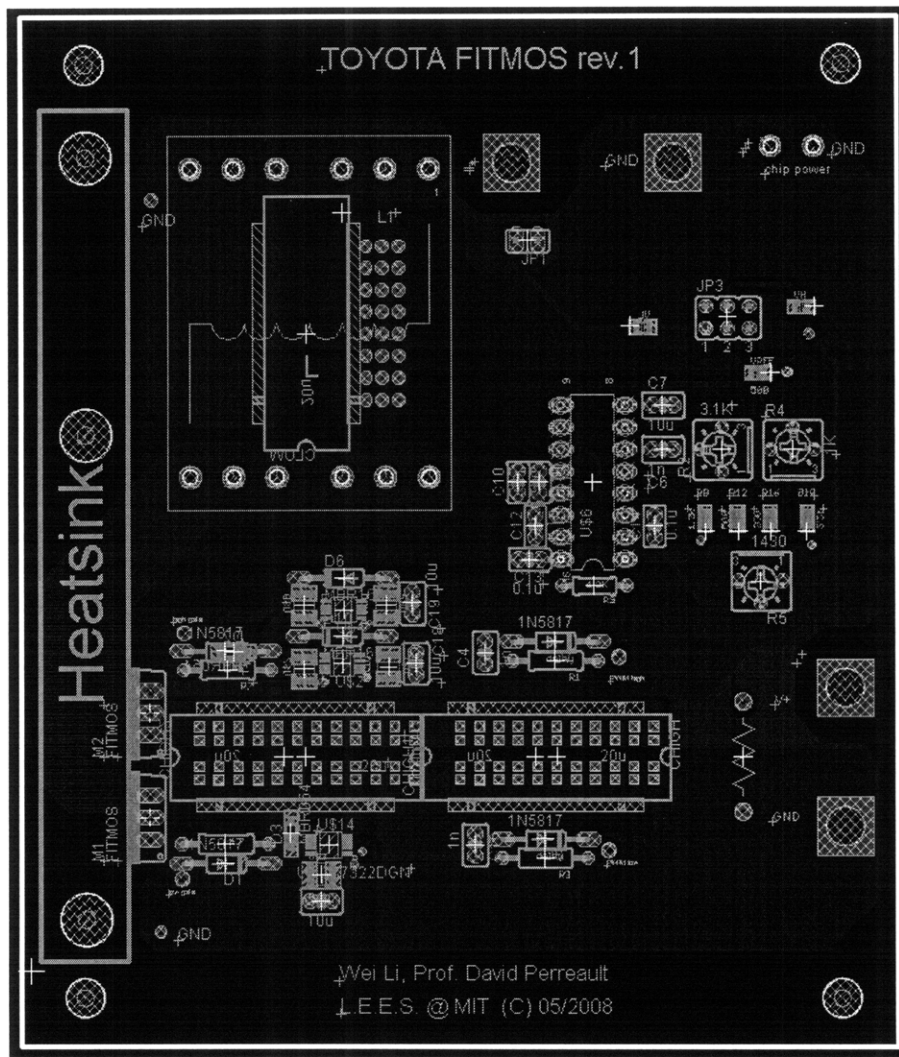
The DC-DC Boost Converter PCB layout drawn in EAGLE
